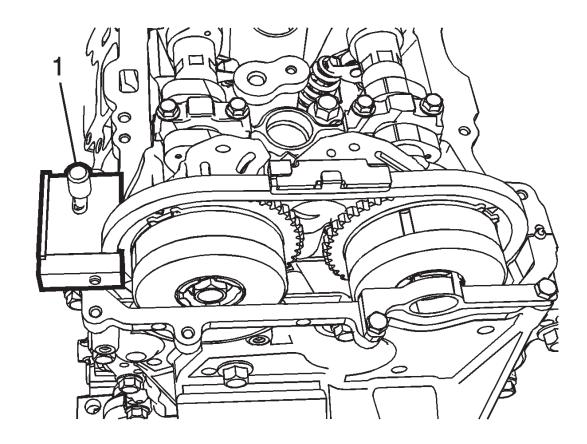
Identifying Timing Chain Holding Tool Courtesy of GENERAL MOTORS COMPANY
